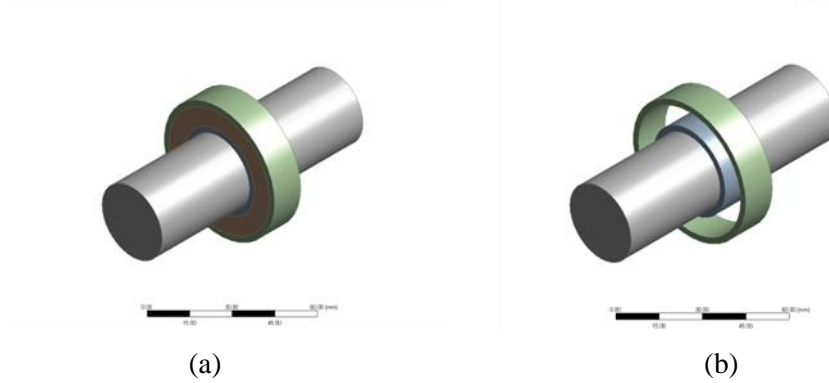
(a) 3D CAD diagram of the connected bearing model and (b) the simplified bearing geometry.
